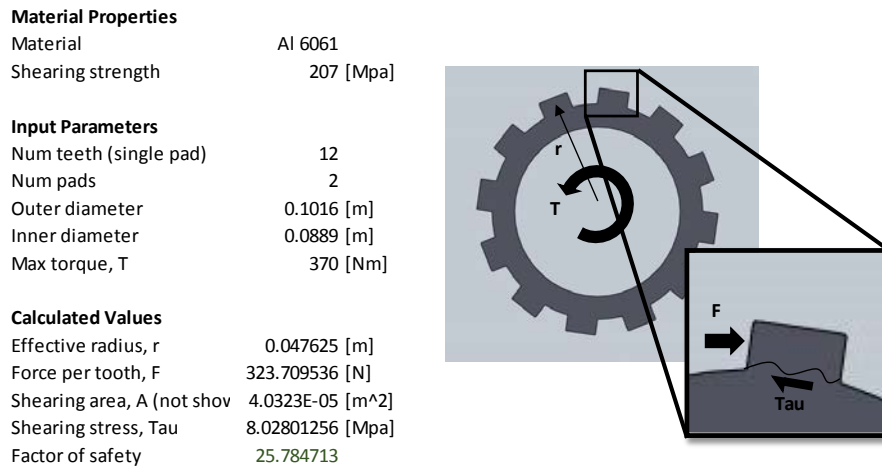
Tooth shearing calculations for Al 6061-T6 clutch disc.
